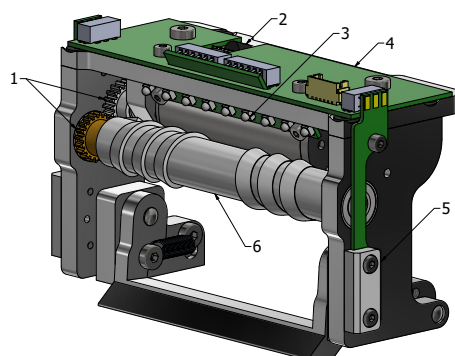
v2020 dribbler. 1) Gear. 2) Temperature sensor. 3) Infrared (IR) scan array. 4) IR controller PCB. 5) IR barrier PCB and cover. 6) Roller with helix shape.
